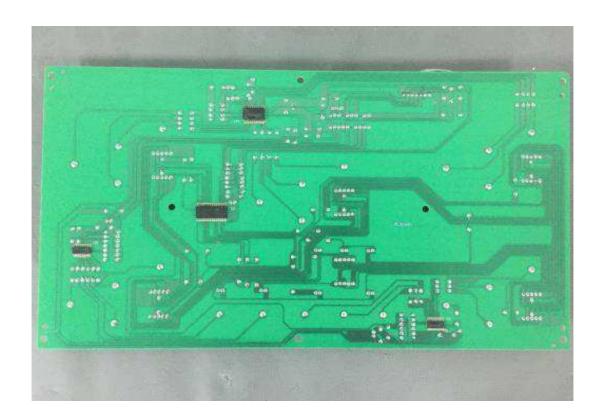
Optional internal view of C74E Power PCB 01 (top)
